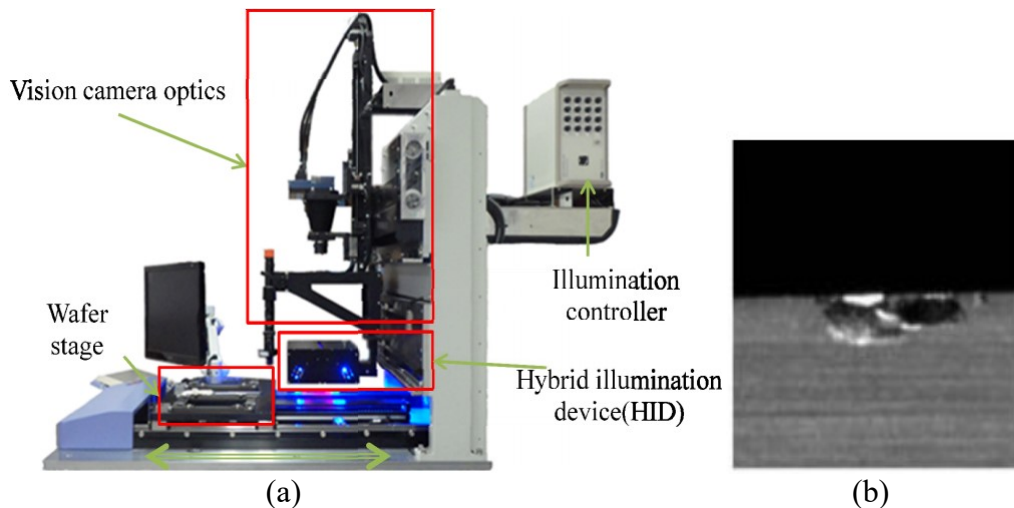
Wafer inspection system proposed by Kim with (a) a top view line scan camera paired with a hybrid illumination device, and (b) a chipping image captured from the device. (Kim, 2014)
